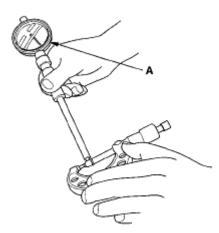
Measuring Diameter Of Shaft At Rocker Courtesy of AMERICAN HONDA MOTOR CO., INC.
